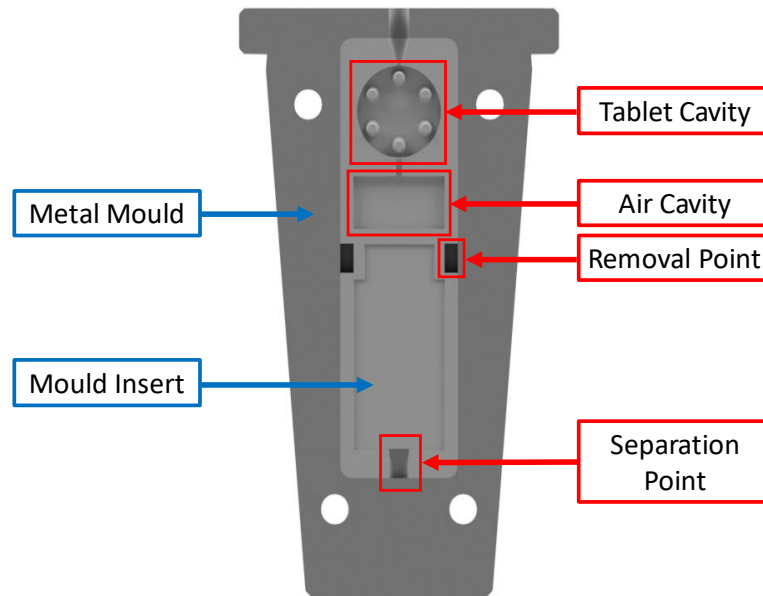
The mould insert for the 6 Pin Design inserted into the metal mould. This depiction represents one half of the full mould.
